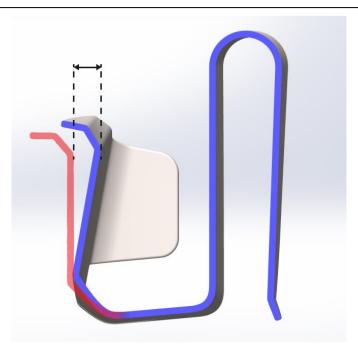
The amount of flex needed in order for the holder to be removed from the tool in the molding process
